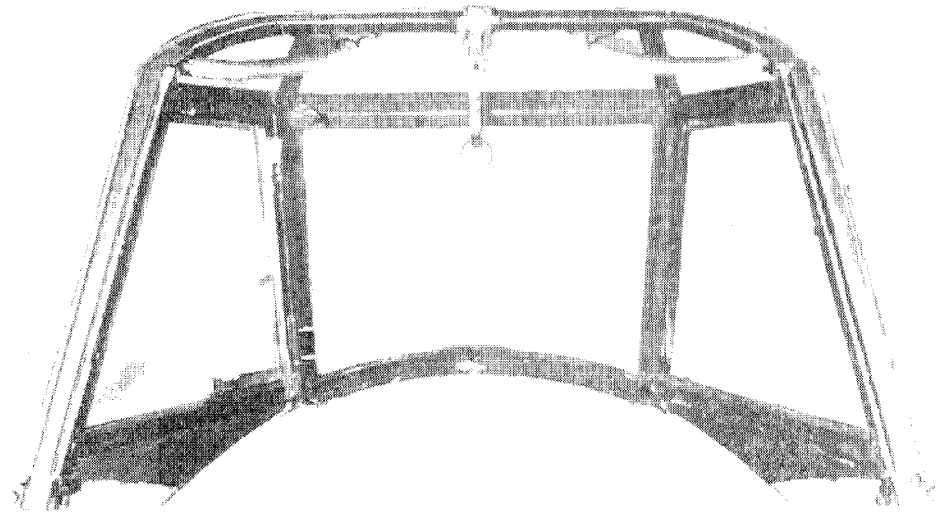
COMPLETE COCKPIT ENCLOSURE & WINDSHIELD ASSEMBLY FIG. 2
